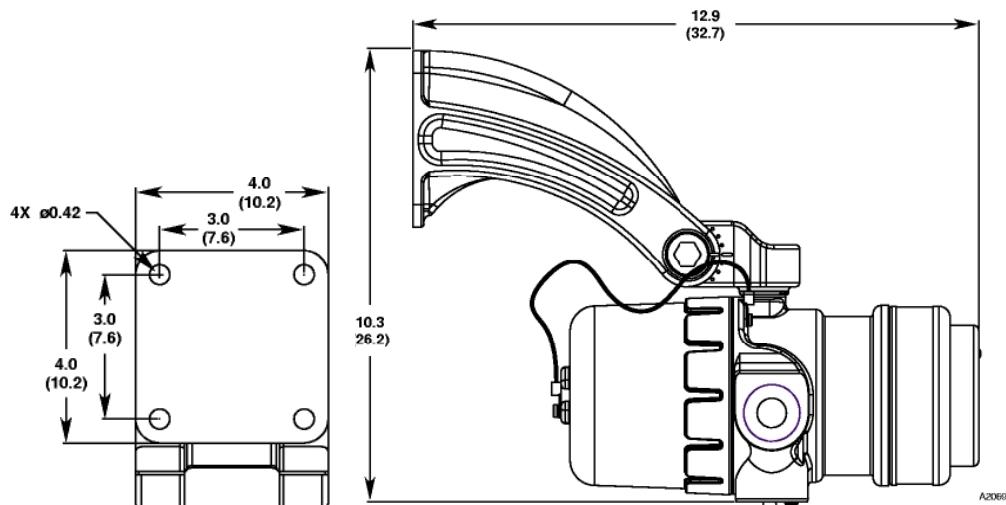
Q9033B Mounting Bracket dimensions in inches (cm)
